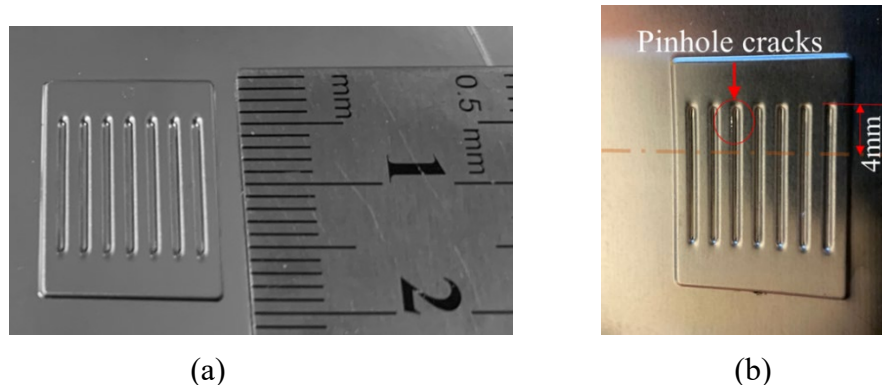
CP-Ti bipolar micro channel plate produced by micro-stamping. (a) Formed without cracks and (b) with pinhole cracks, the location of cross-section for microscope observation is 4mm from the end cavities.
